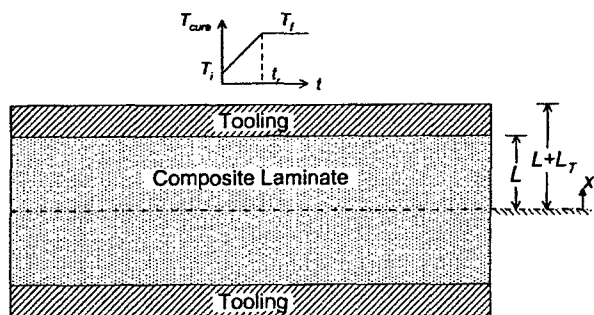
Schematic of a laminate cross section sandwiched between tooling layers in an autoclave process for manufacturing thermosetting composites.
